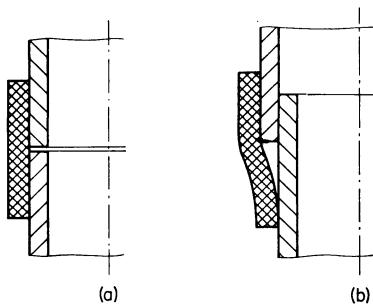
Butt joints with rubber tubing: (a) for pipes with similar diameters; (b) for pipes with dissimilar but fitting diameters (not recommended because of the trapped volumes)
